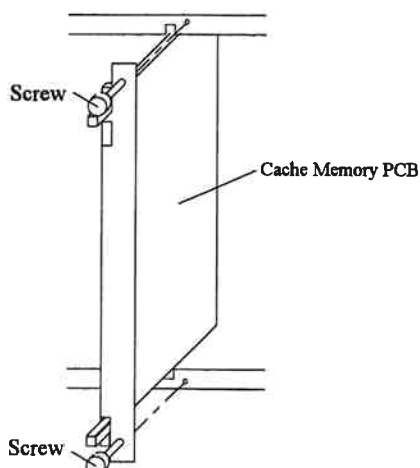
Removal of the Cache Memory PCB
